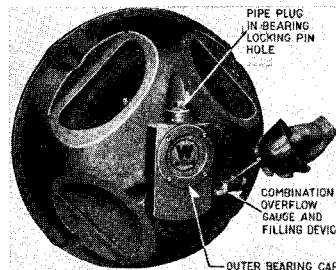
SEALED SLEEVE BEARING BRACKET SHOWING METHOD OF OILING
